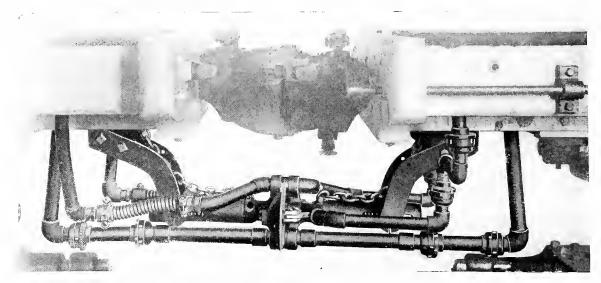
Automatic Connector for Air Brake, Signal and Steam Heat Pipes. Kelly-Arnold Manufacturing Company.
